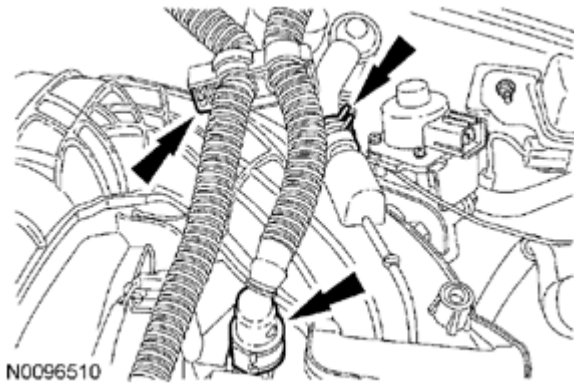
Locating EVAP Tube-To-EVAP Canister Purge Valve Quick Connect Coupling And Brake Booster Vacuum Tube
